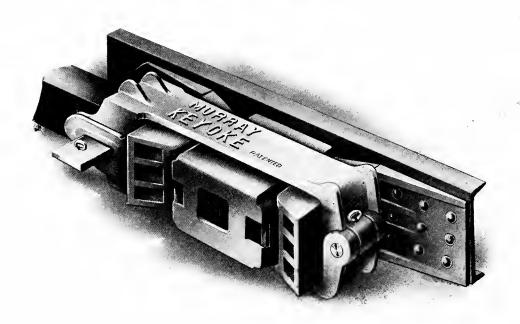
Murray Cast Steel Keyoke Applied to Steel Center Sills in Connection with Friction Draft Gear. Keyoke Railway Equipment Company.
